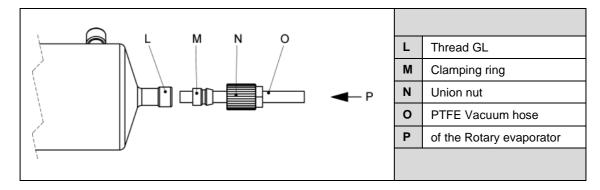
Instruction for assembly of the screw connection for the suction connection
